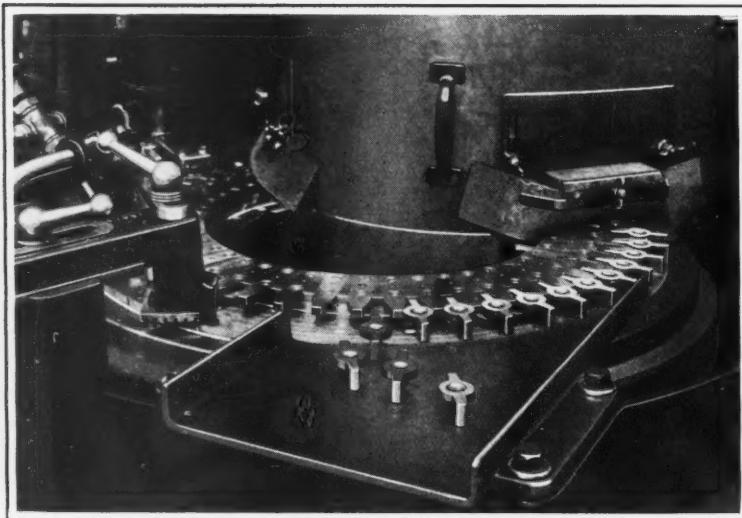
A Simple Fixture Applied to the Magnetic Chuck Serves to Keep the Pieces Properly Positioned
